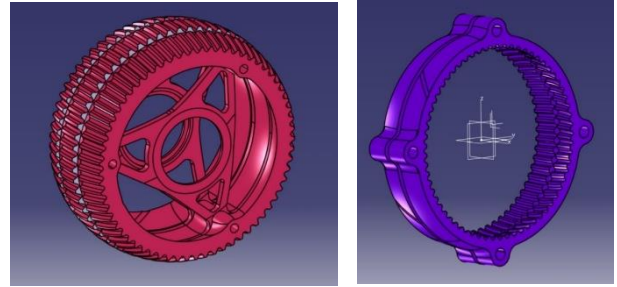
MS5G1R1 rotor(left) and stator (right) with complex shape for AM manufacturing
